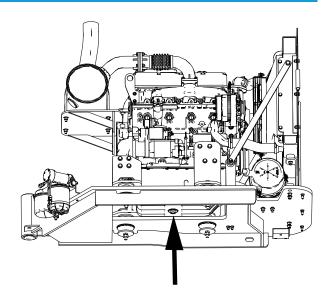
WEICHAI WP3.2 engine oil drain valve
